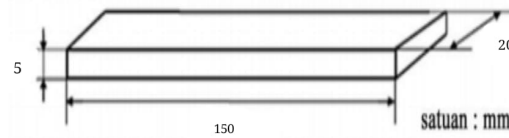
Dimensions of the JIS Z 2204 standard bending test specimen
